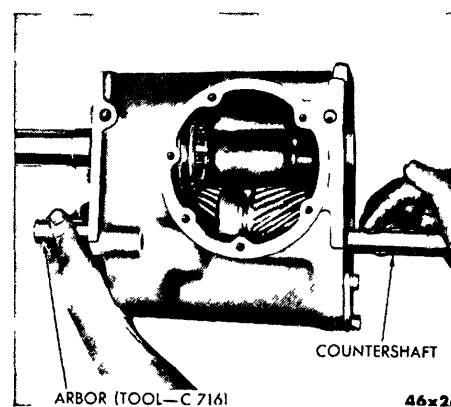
Special arbor in use for removing and installing countershaft. 1946-52 automatic transmission
